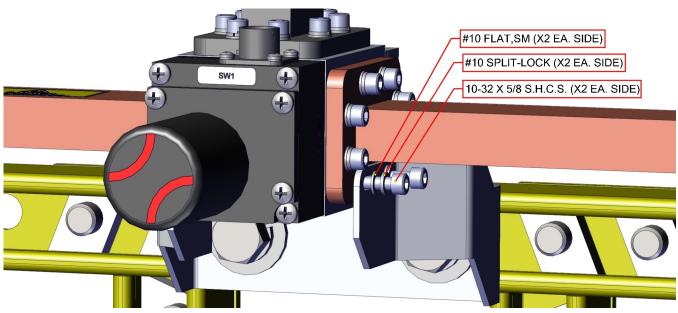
Connect Switches to Support Brackets, C-Band (typical)
